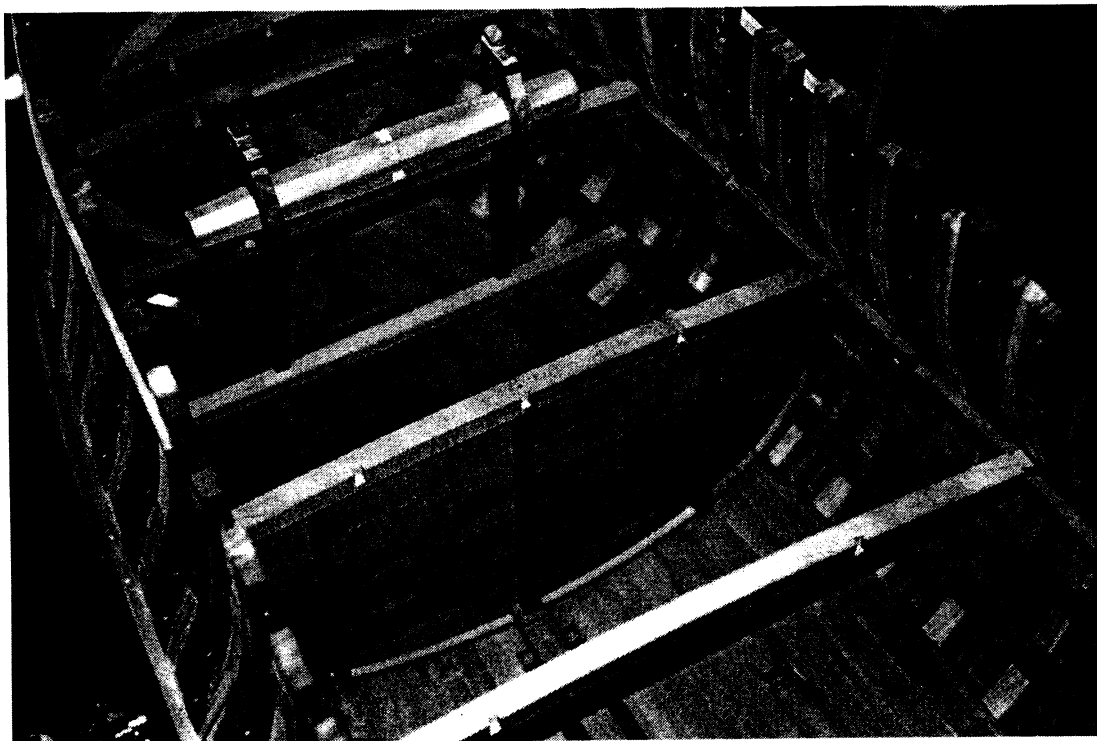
Forward bulkhead installed. Notice the three stanchions and continuous line of nailers supporting the planking. Photo by G. Grieco.
